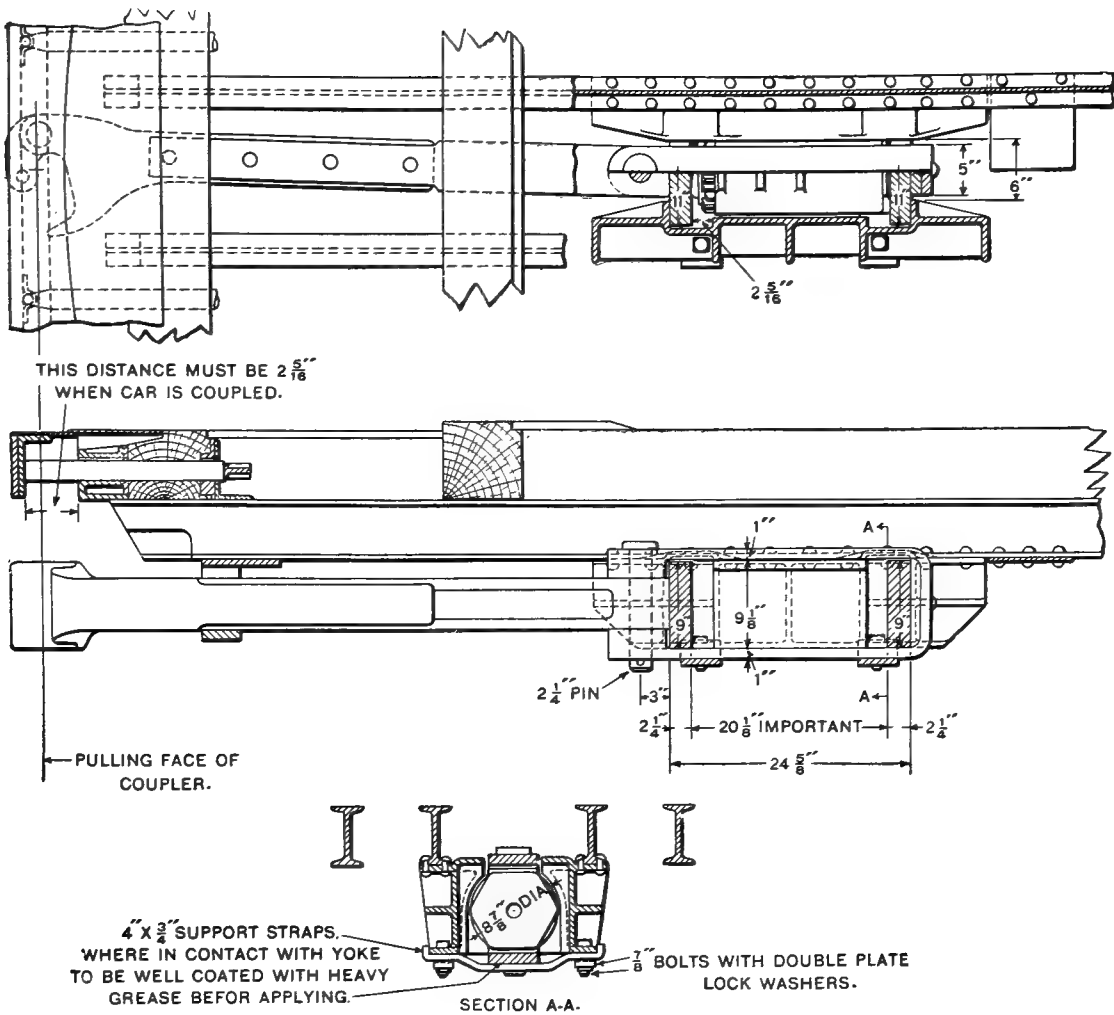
Westinghouse Type D-3 Friction Draft Gear with Continuous Draft Plates with Limiting Stops, for Passenger Equipment with Standard Steel Platforms. Westinghouse Air Brake Company.
